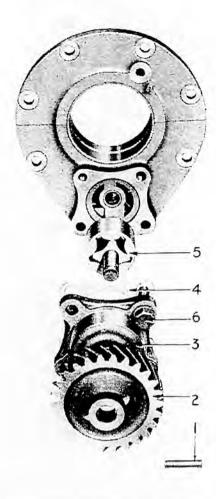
OIL PUMP AND FRONT MAIN BEARING HOUSING
